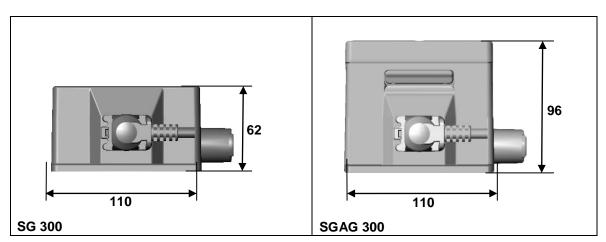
Dimensions of the SG(AG) 300 control unit, side view (in mm)
